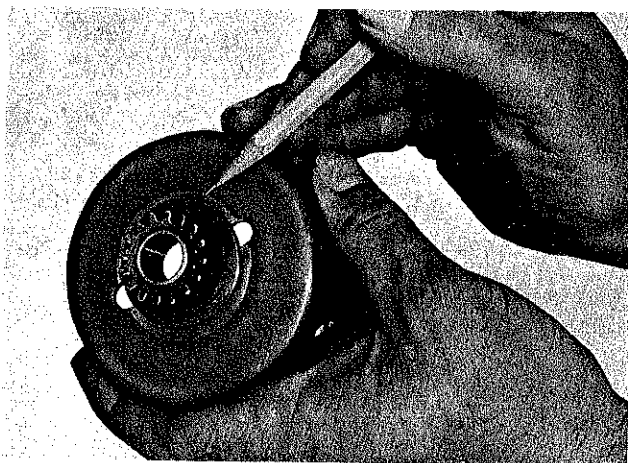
Inspection of the clutch drum assembly includes the pinion gear, bushing, and the friction surface of the drum. This surface is opposite to the pinion, on the inside.
